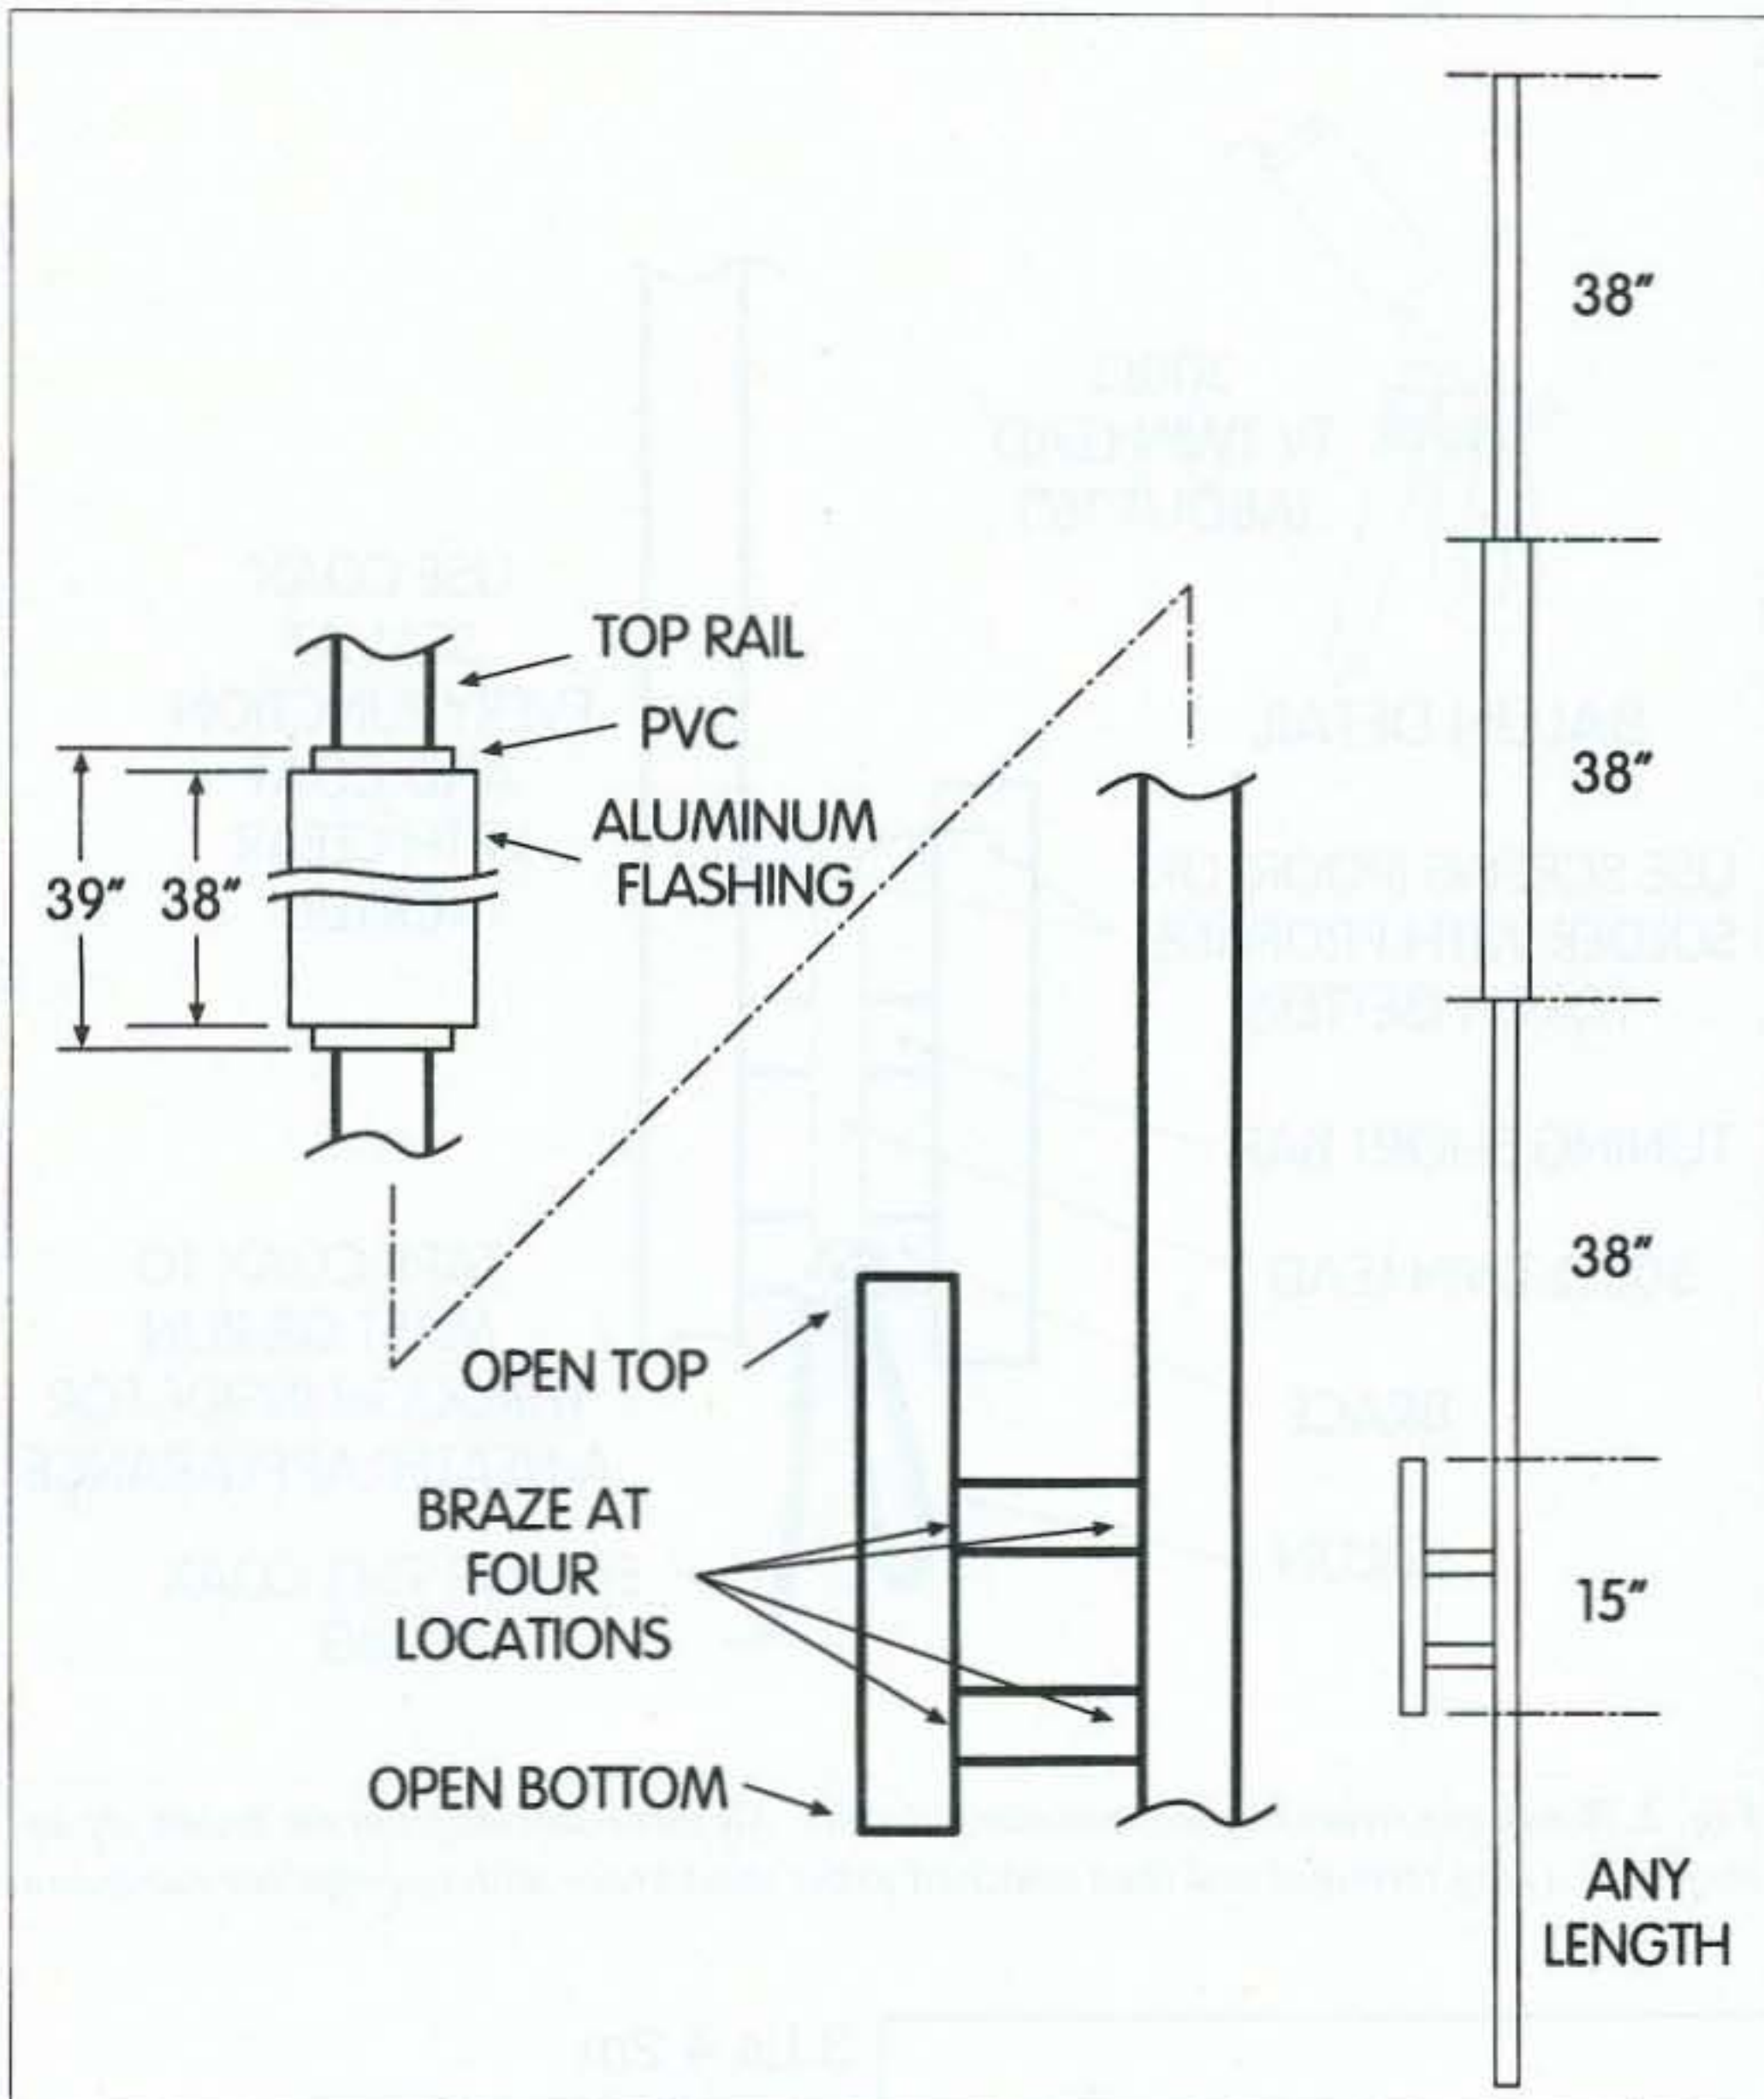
Overall dimensions and construction details of the coaxial vertical.
